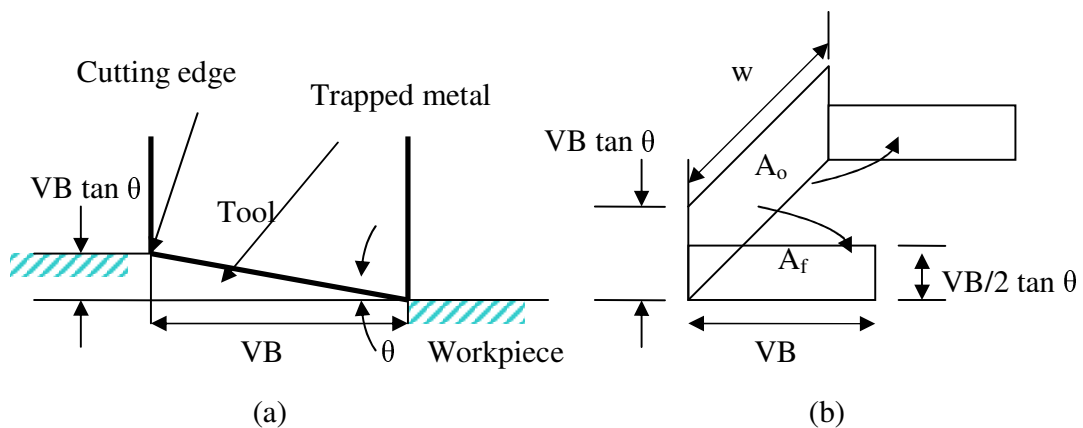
Schematic diagram: (a) side view, (b) 3D view to approximate entrapped work material area, A_o , and side extruded area, A_f , beneath the tool flank wear contact [68].
